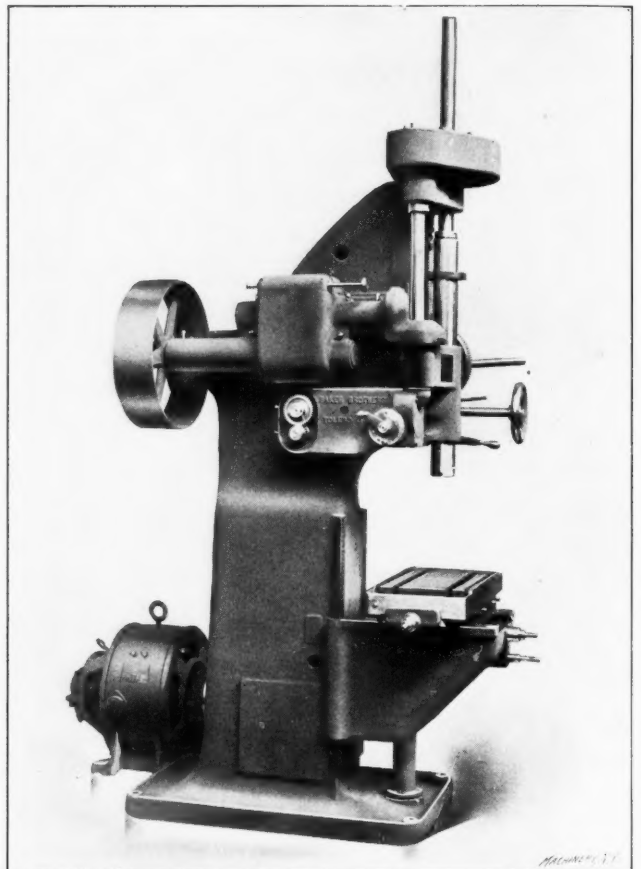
Baker Brothers High-speed Drilling Machine on which Tests were made
